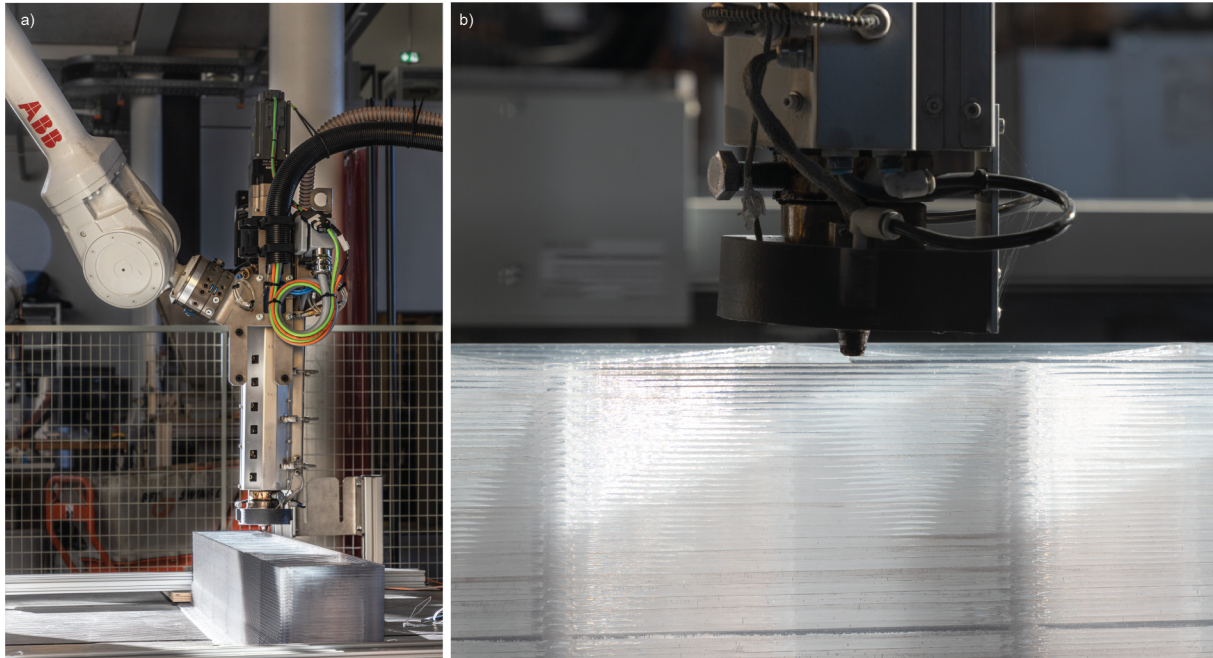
a. Robotic 3D printing setup, comprising a CEAD E25 extruder mounted on an ABB IRB4600. b. Close-up of the polymer printing process: PETG printed with 2.5mm layer height and 6mm layer width.
